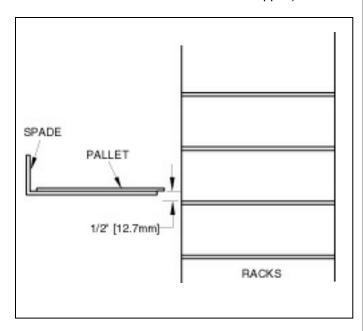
SWITCH LS-13 ADJUSTMENT.
